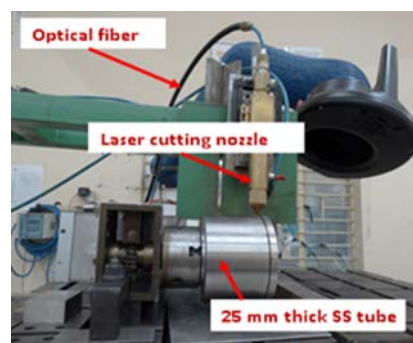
Shows a view of laser cutting mock-up of 25 mm thick SS.
